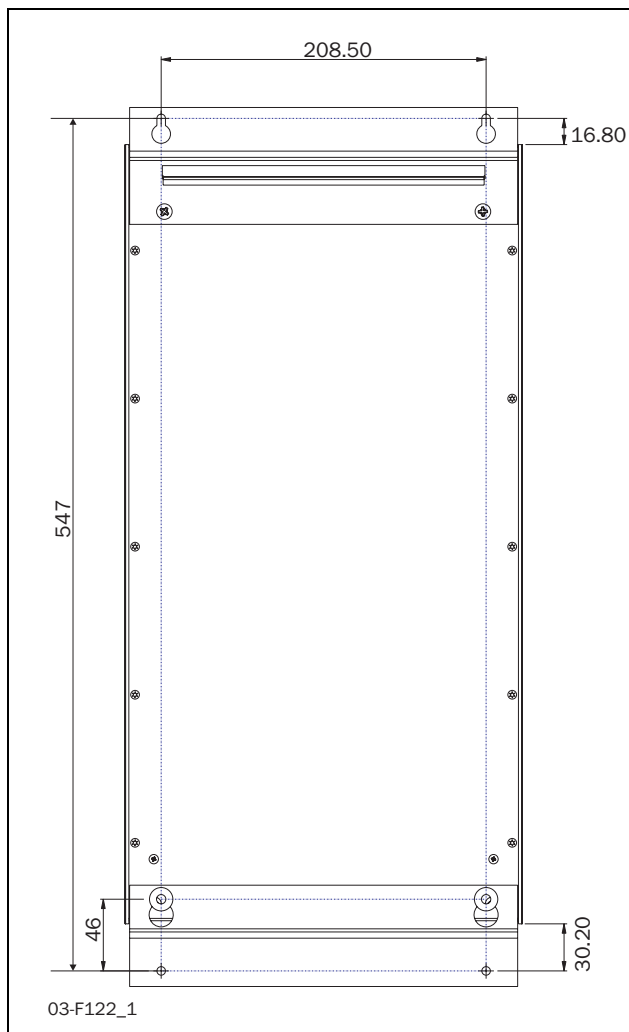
Hole pattern for MSF-170 to MSF-250 with upper mounting bracket instead of DIN rail.
